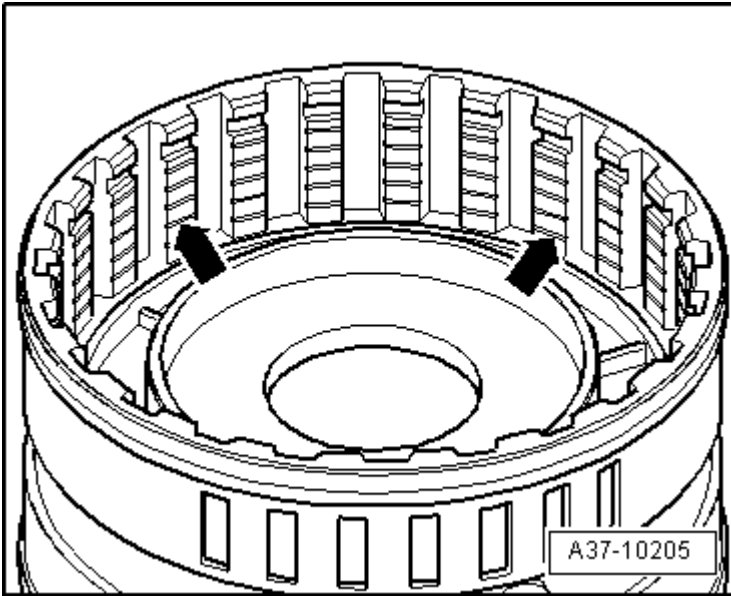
Signs Of Wear At Cylinder "F" Caused By Coated Plate
